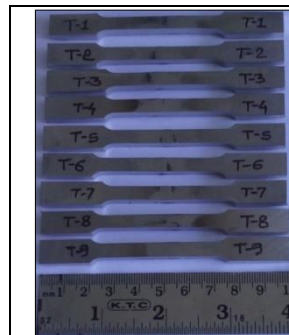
Photograph of Tensile Test Sample for TIG Weld
